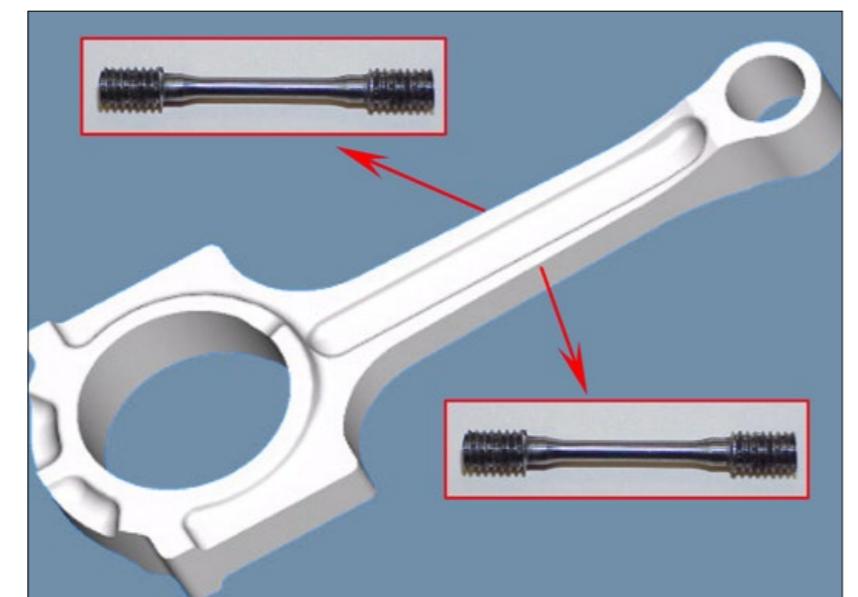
Cylindrical specimens machined from the I-beam of PF connecting rods manufactured with HS170M [6] (Courtesy MPIF)
